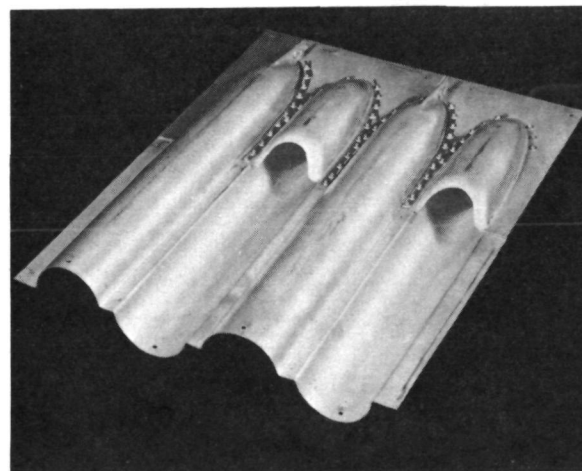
SINGLE SHEET END CLOSURE DEVELOPMENT SPECIMEN
